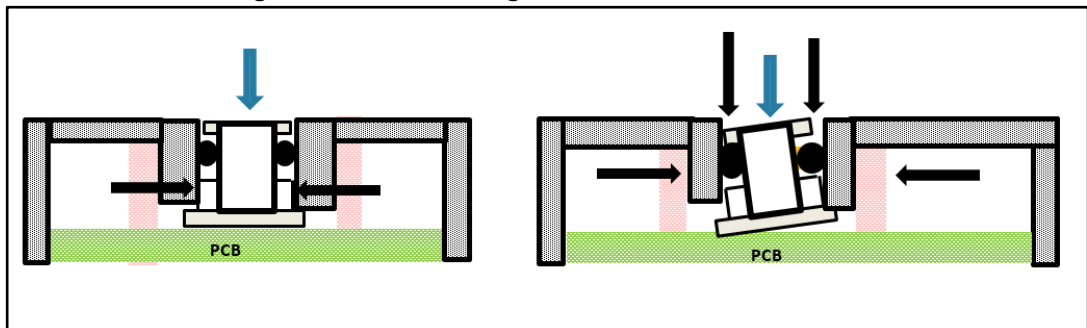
"Incorrect configuration for mechanical stress" above shows examples of incorrect integration where the embodiment structure is directly in contact with the sensor package, causing mechanical stress that can cause deterioration of the performance of the sensor. Thus, a minimal clearance has to be maintained to avoid any force applied to the sensor, also taking into consideration manufacturing tolerances.
